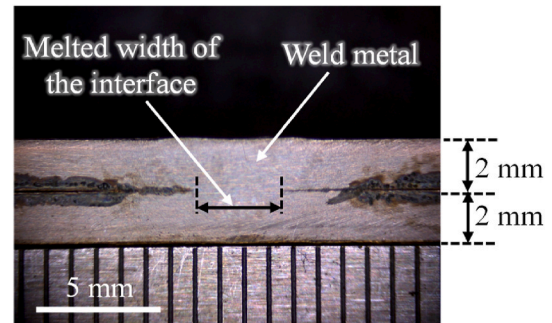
Cross-sectional macro after the welding time 30 s of thin plate condition.
